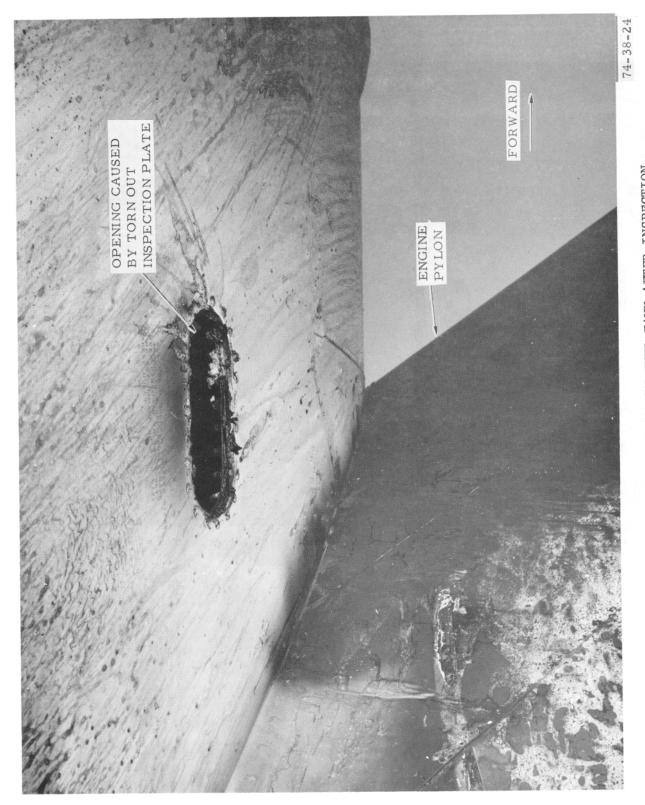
EXISTING OPENING IN FUEL TANK AFTER INSPECTION PLATE HAD BEEN PULLED OUT
